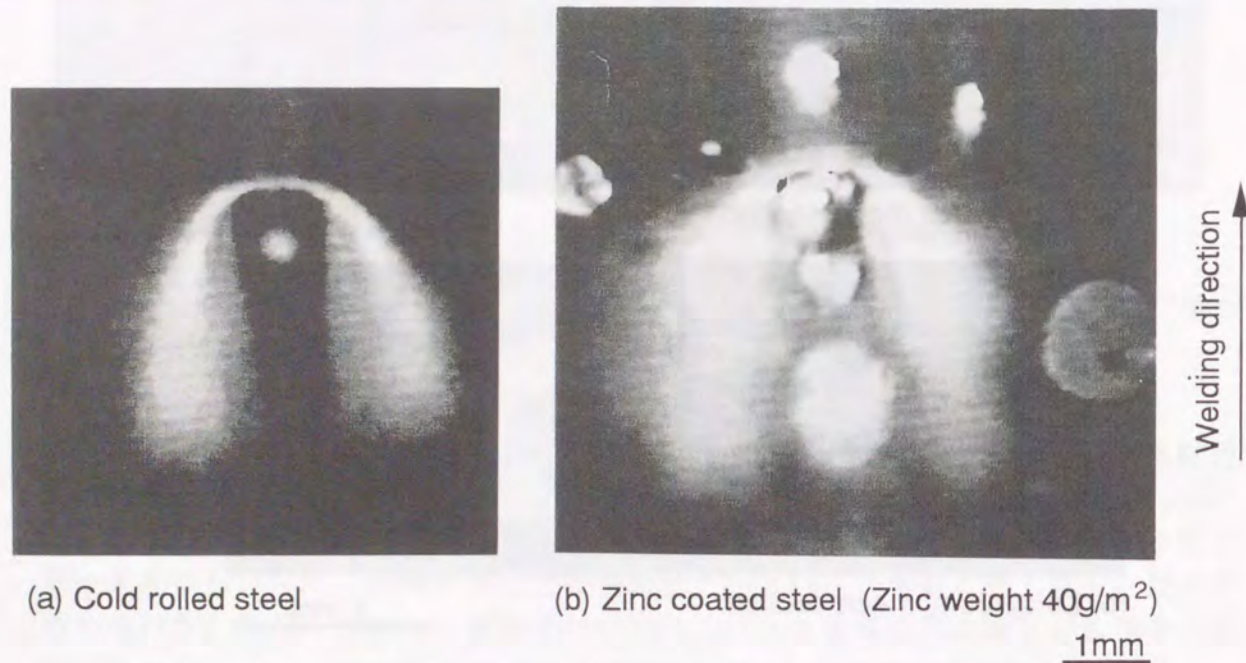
Laser welding phenomenon observed by the laser strobe
